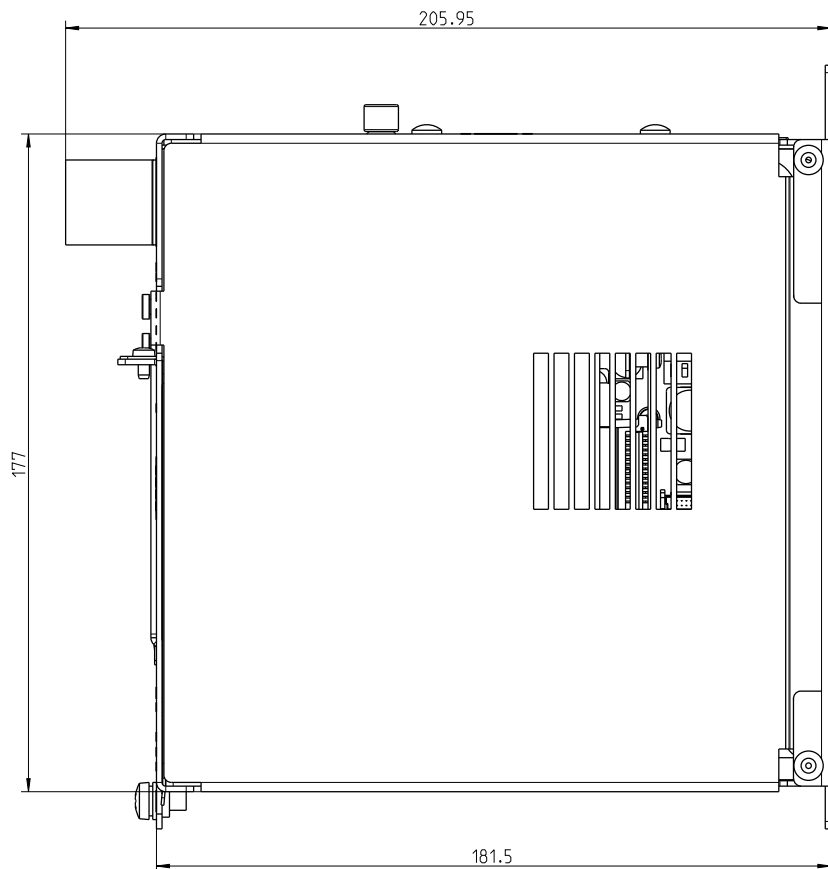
Housing dimensions, devices with two slots, side view from the right
